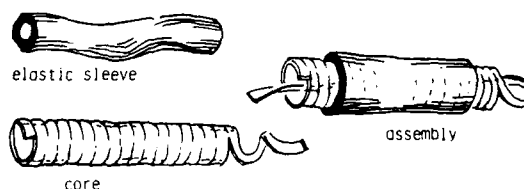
PRESTRETCHED TUBE ASSEMBLY
